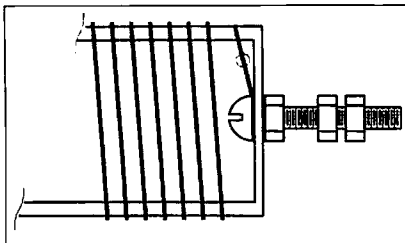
A small machine screw-and-nut assembly provides coil strain relief.
